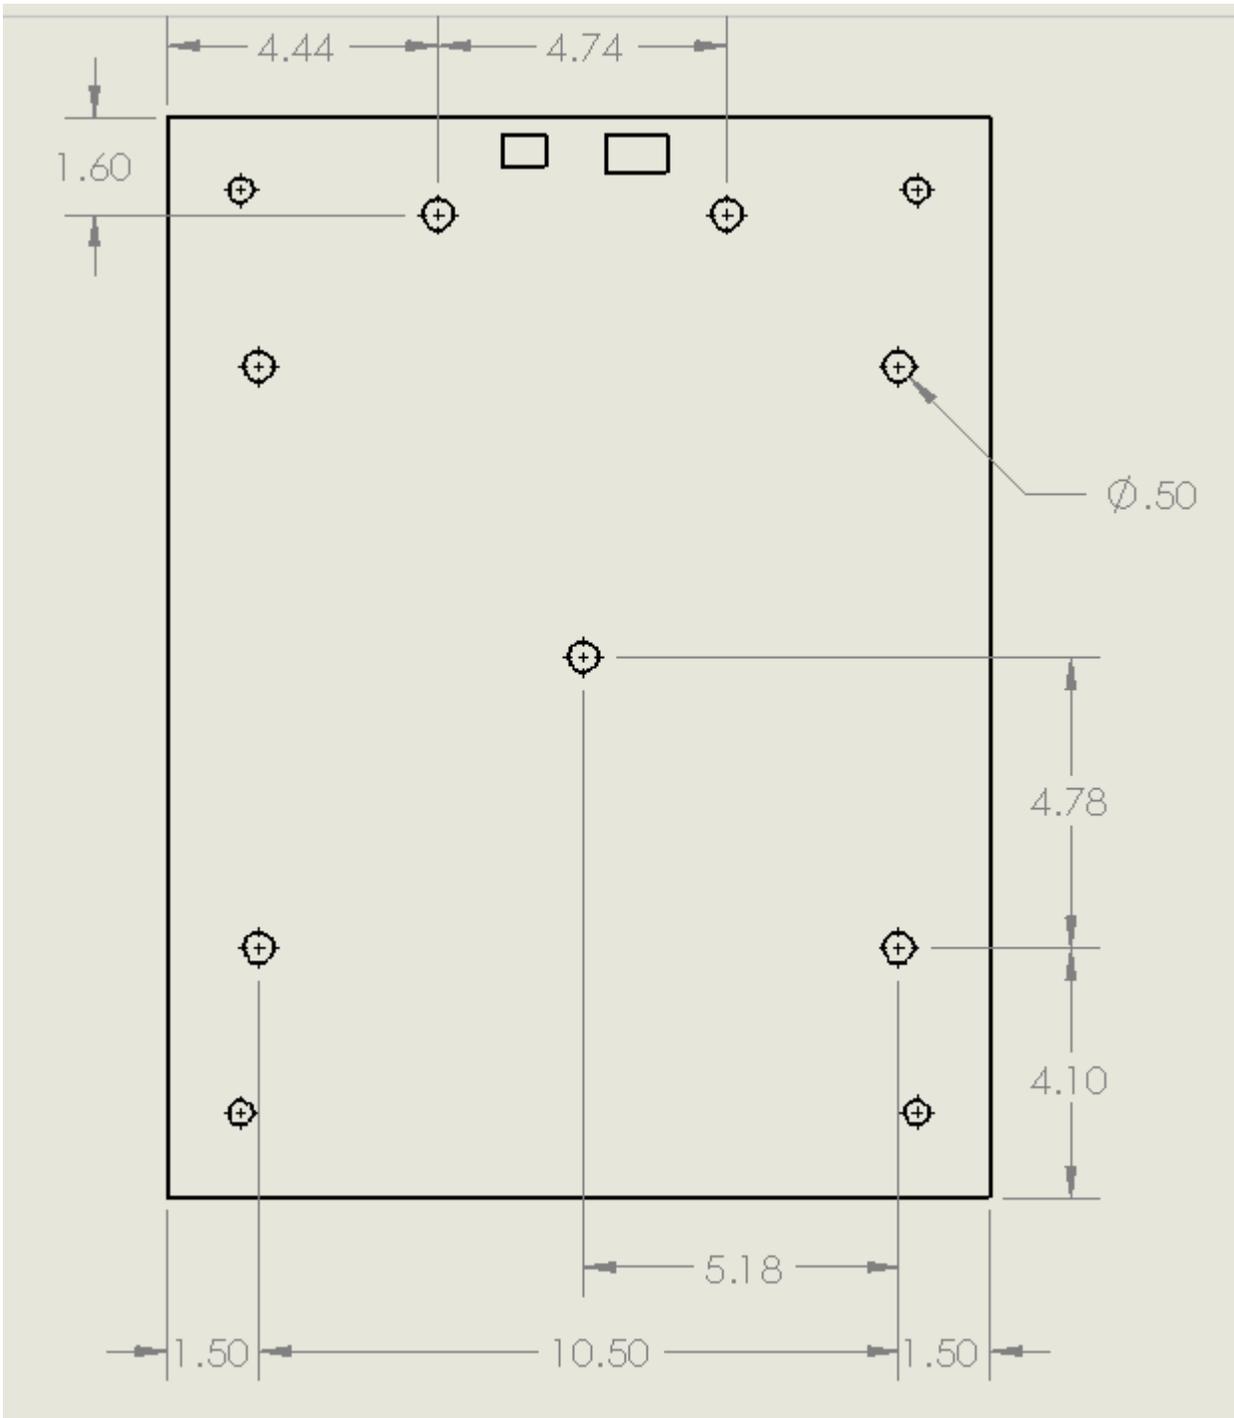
Anticipated HASP mounting plate modifications. Seven holes will be drilled in order to mount the payload. All of the drilled holes will be 0.5 inches in diameter. (units in inches)
